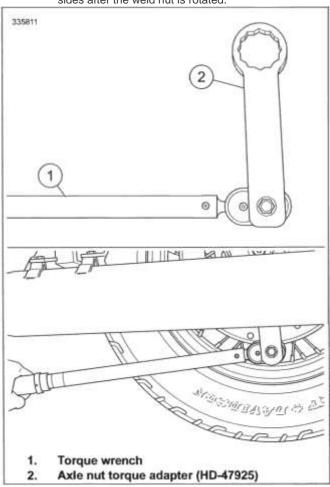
Install Tool Perpendicular to Torque Wrench 2. Install saddlebags.
